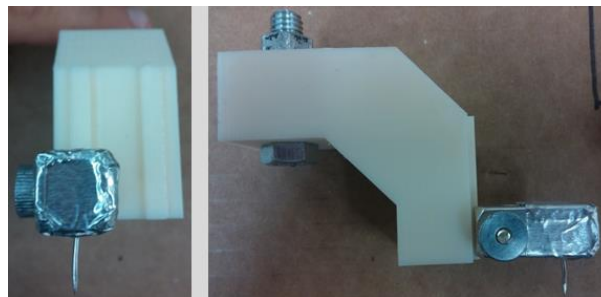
Precision Test Pin Head Attachment Front View (Left), Side View (Right)
